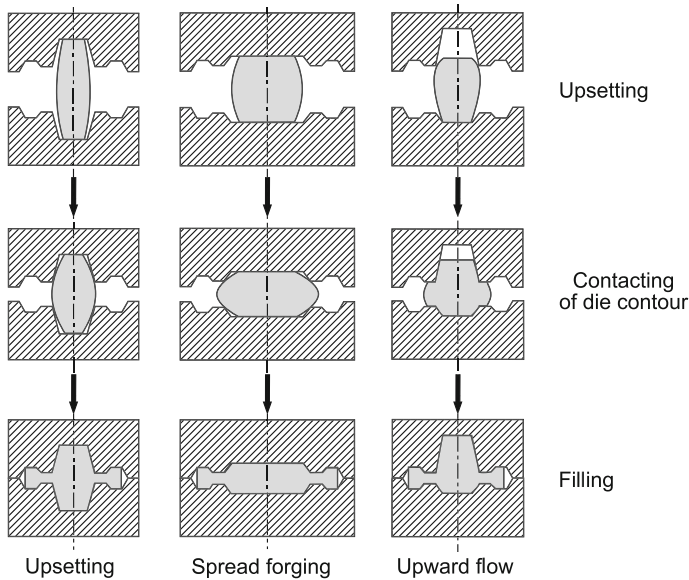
Basic types of processes for filling forging dies [LANG90b]
